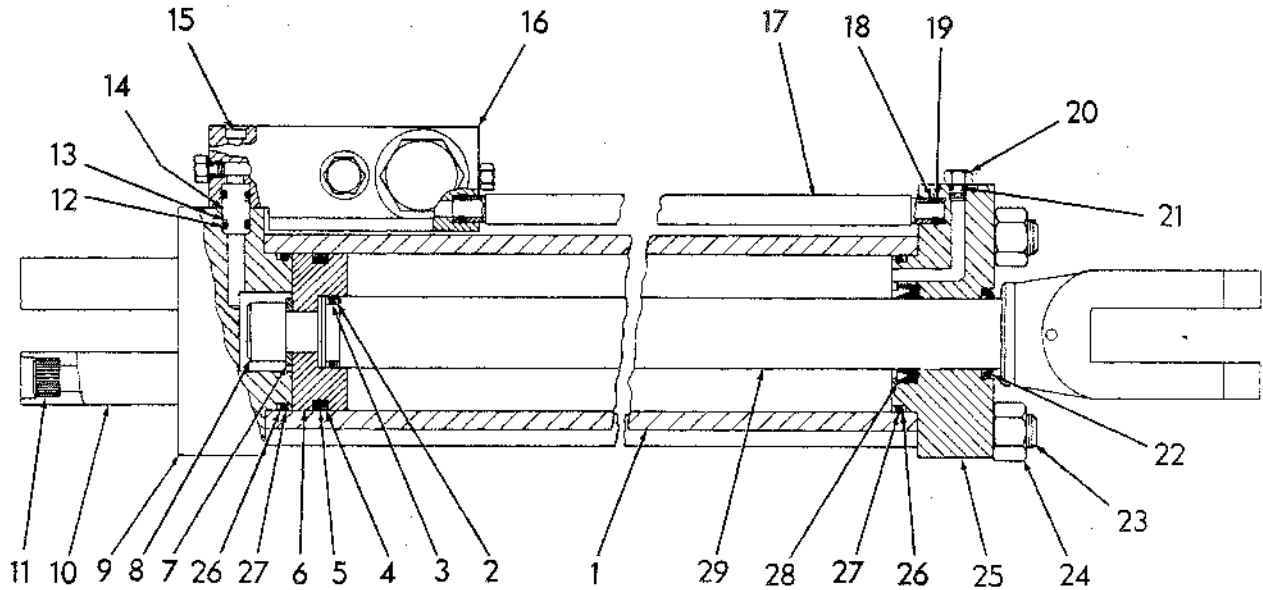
TILT CYLINDER -SECTIONAL VIEW T-79647
